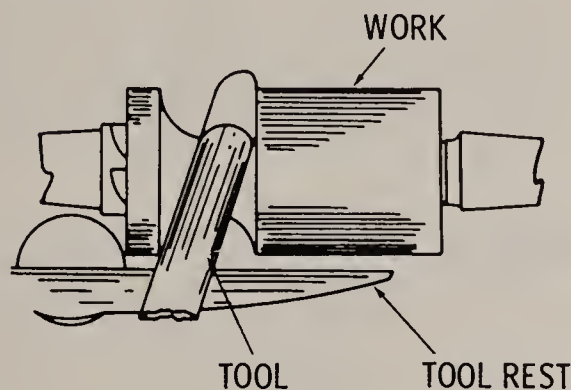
Proper tool position at start of "rolling" cut. The ground portion of the tool is at right angles to the side of the groove.
